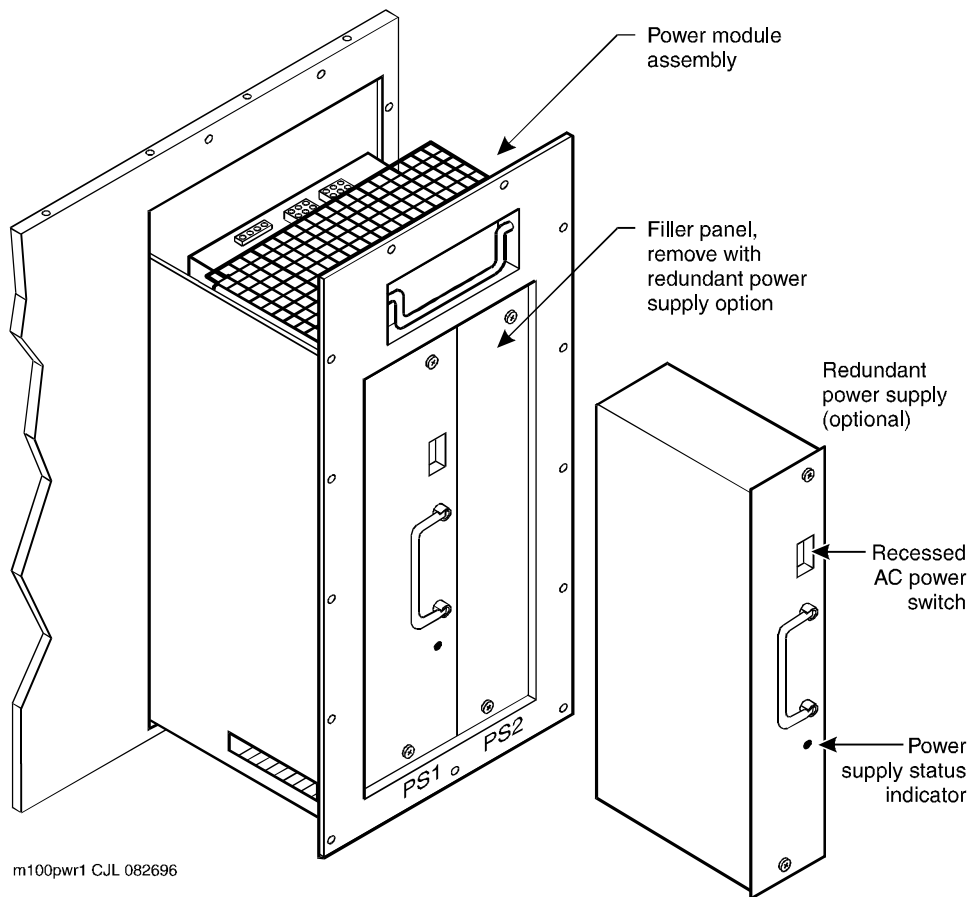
Power Module Assembly with Redundant Power Supply Capability
